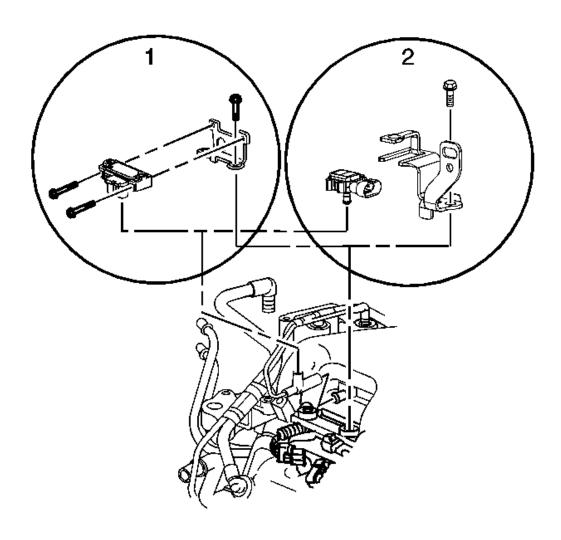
Removing MAP Sensor & Bolts Courtesy of GENERAL MOTORS CORP.
